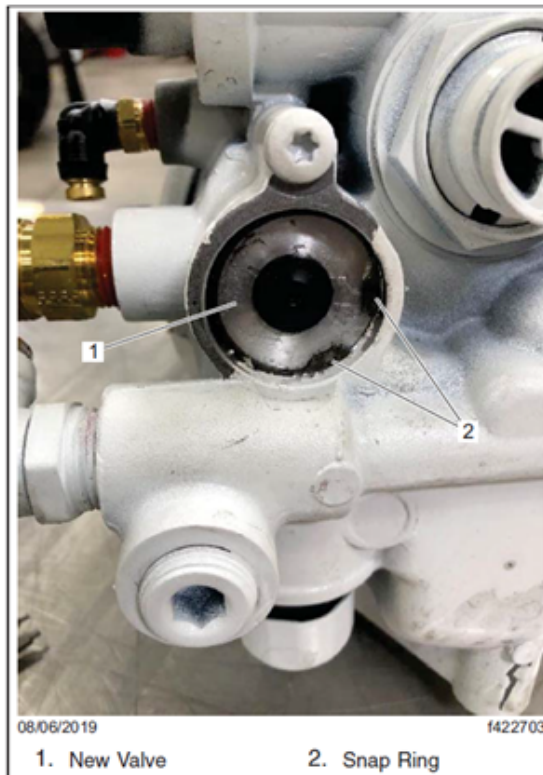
, Snap Ring and New Valve Installed on the Air Dryer
